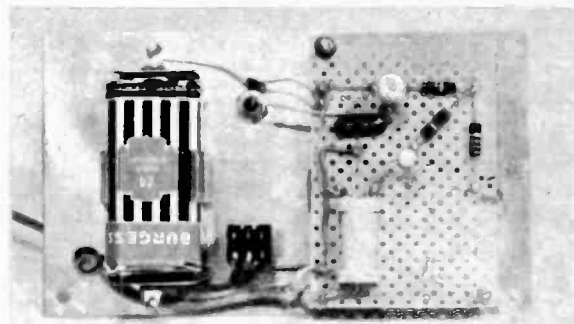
Battery holder, switch S1, input jack J1 and board are mounted on back of box's metal cover. Relay is held to board by its solder lugs.
